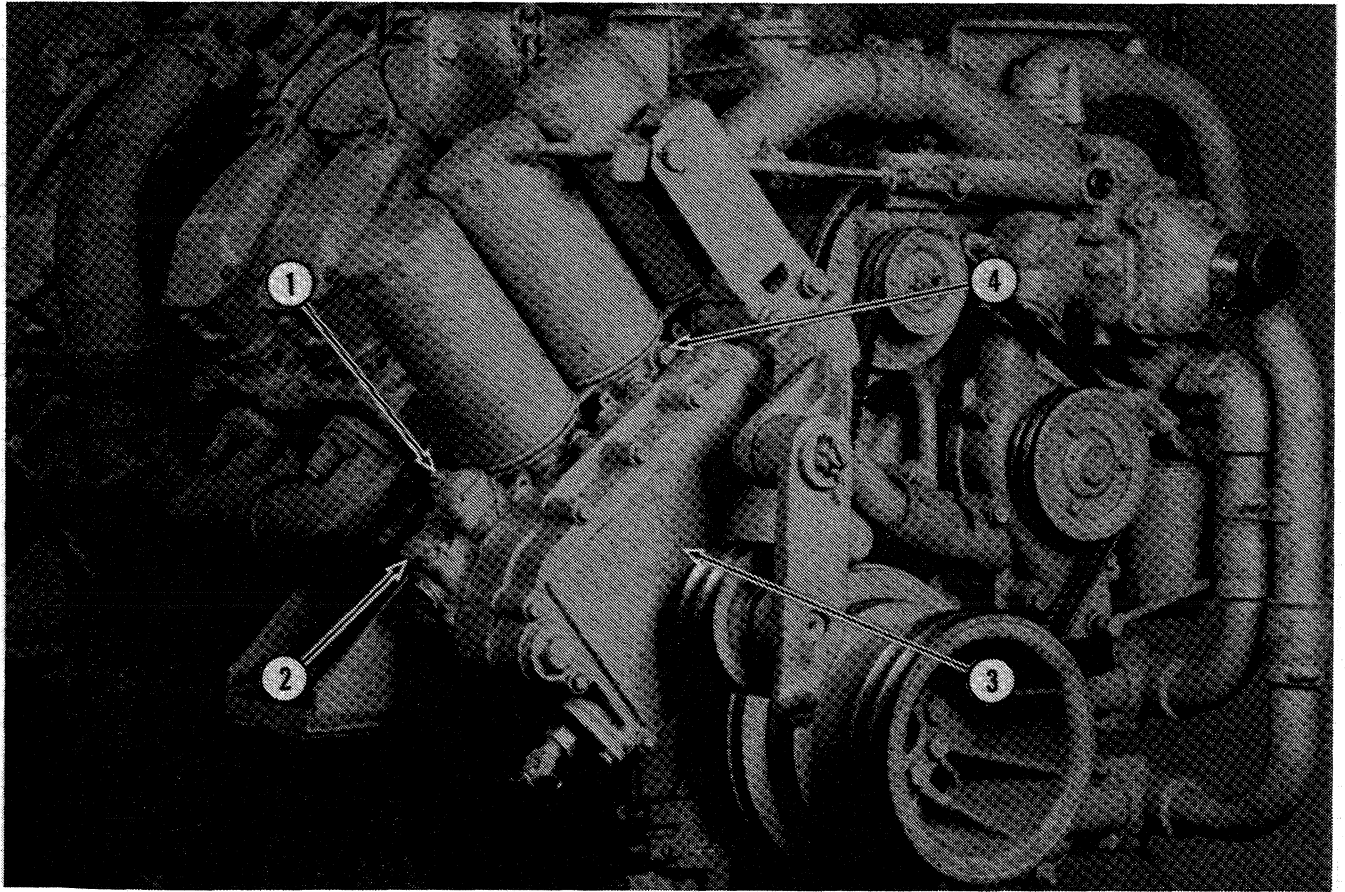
ENGINE OIL COOLER, FILTERS, AND FILTER BASE
